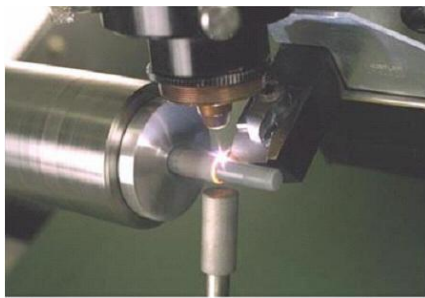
Laser assisted machining of ceramic (Purdue Univ.)
